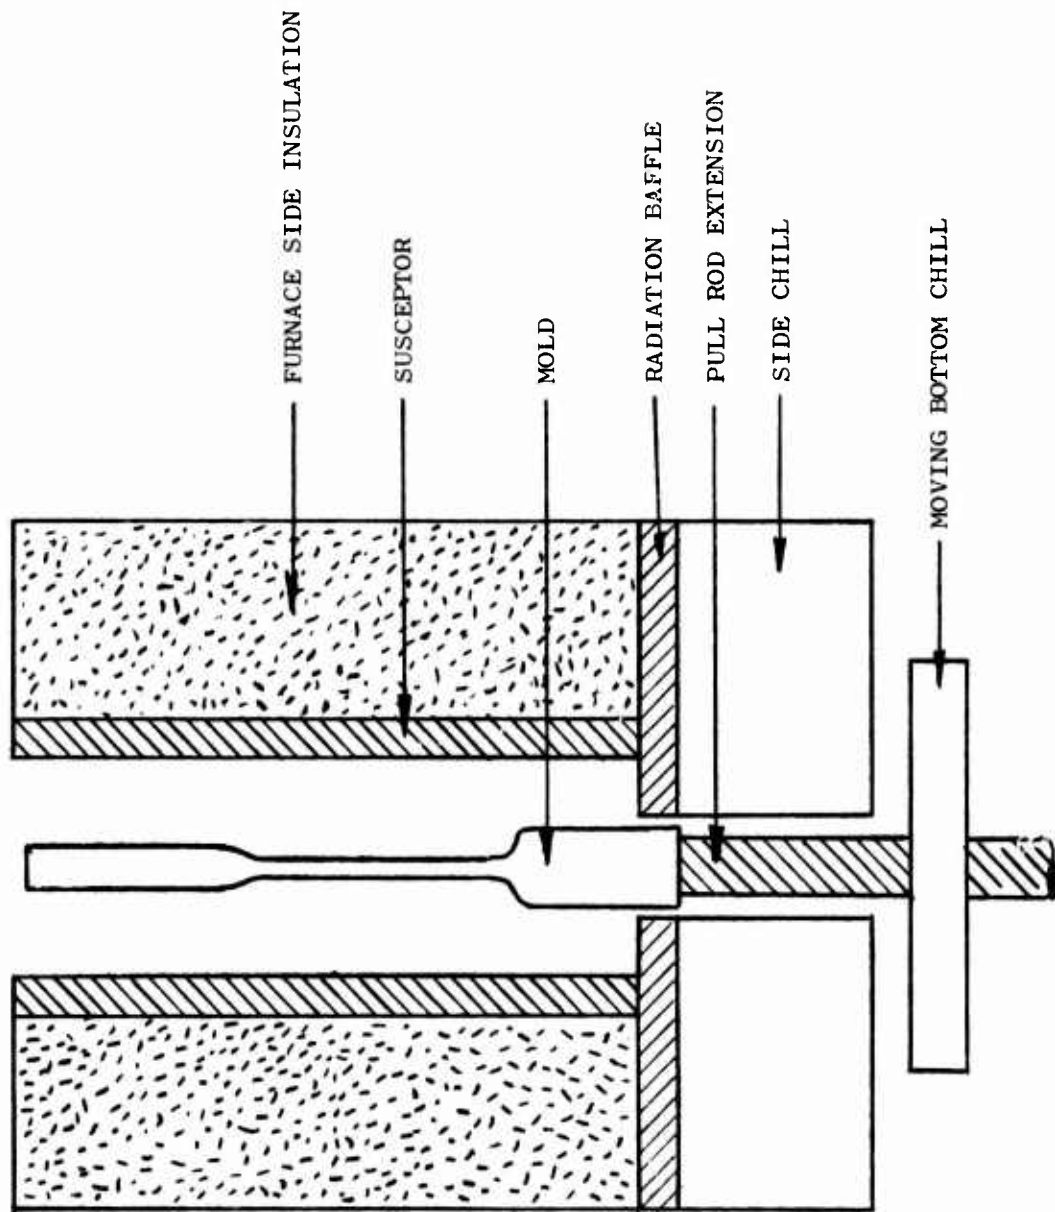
Modified PFS Furnace for Blades, Illustrating Addition of Side Chill and Pull Rod Extension
